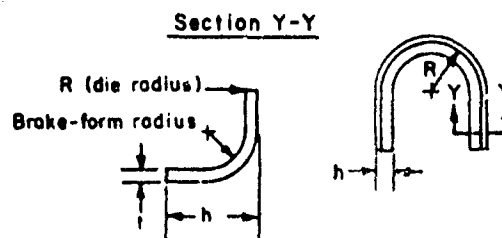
STRETCH-FORMED SECTION (INBOARD)(3,4,5)
